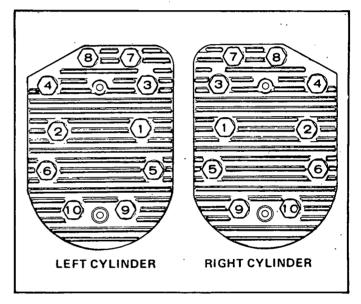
HEAD BOLT TIGHTENING SEQUENCE
